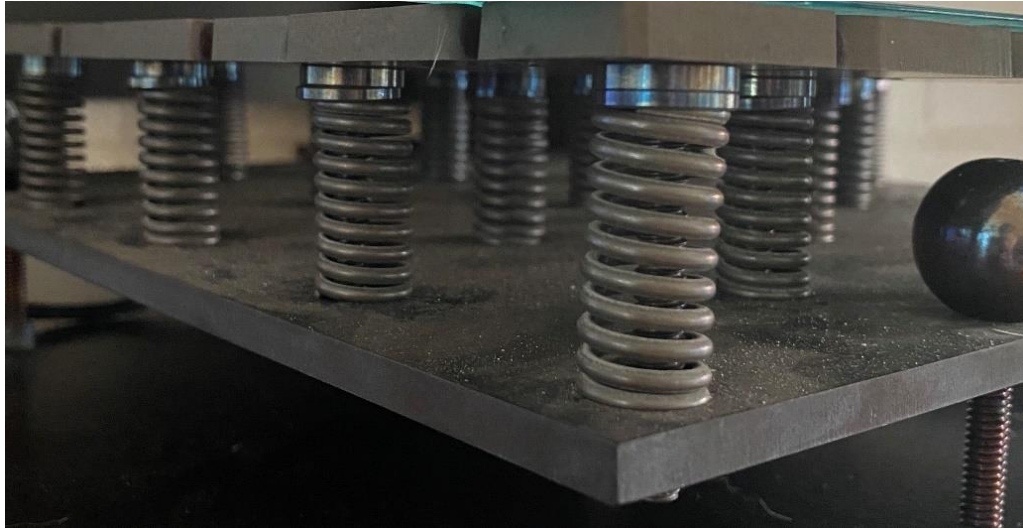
Second Prototype Adaptable Mold Spring and Washer Feature
